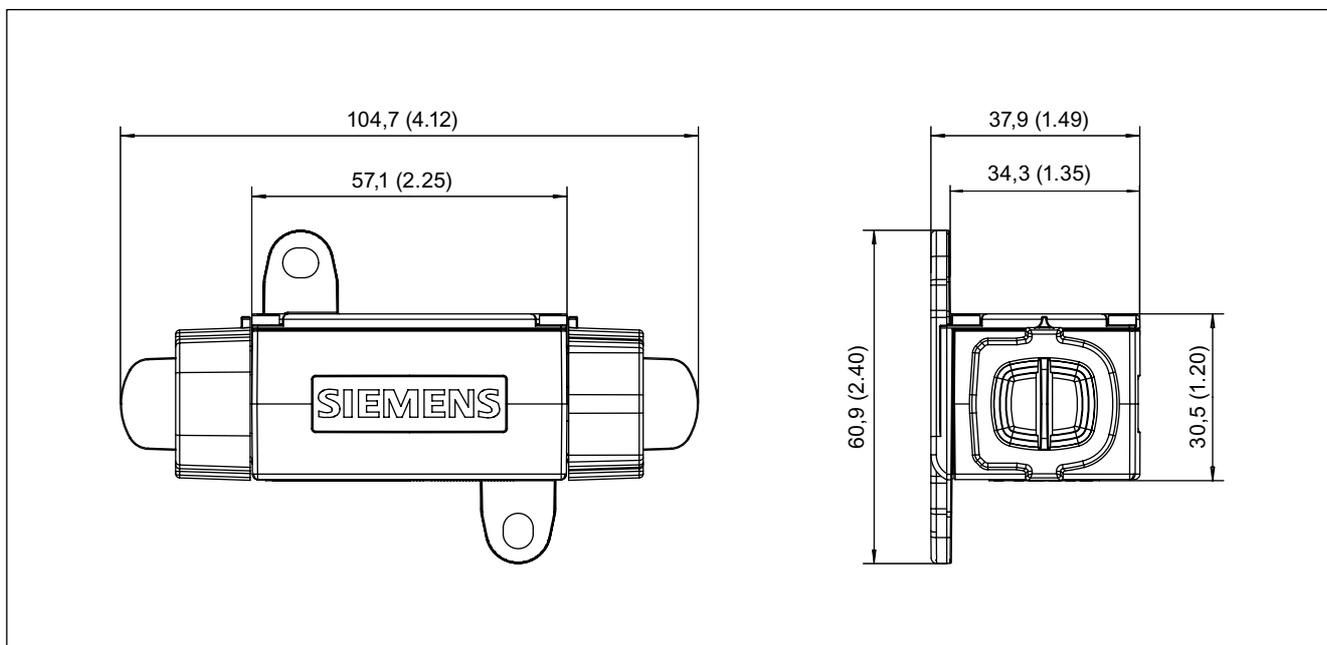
Dimension drawing of the DRIVE-CLiQ coupling, all dimensions in mm and (inches)
